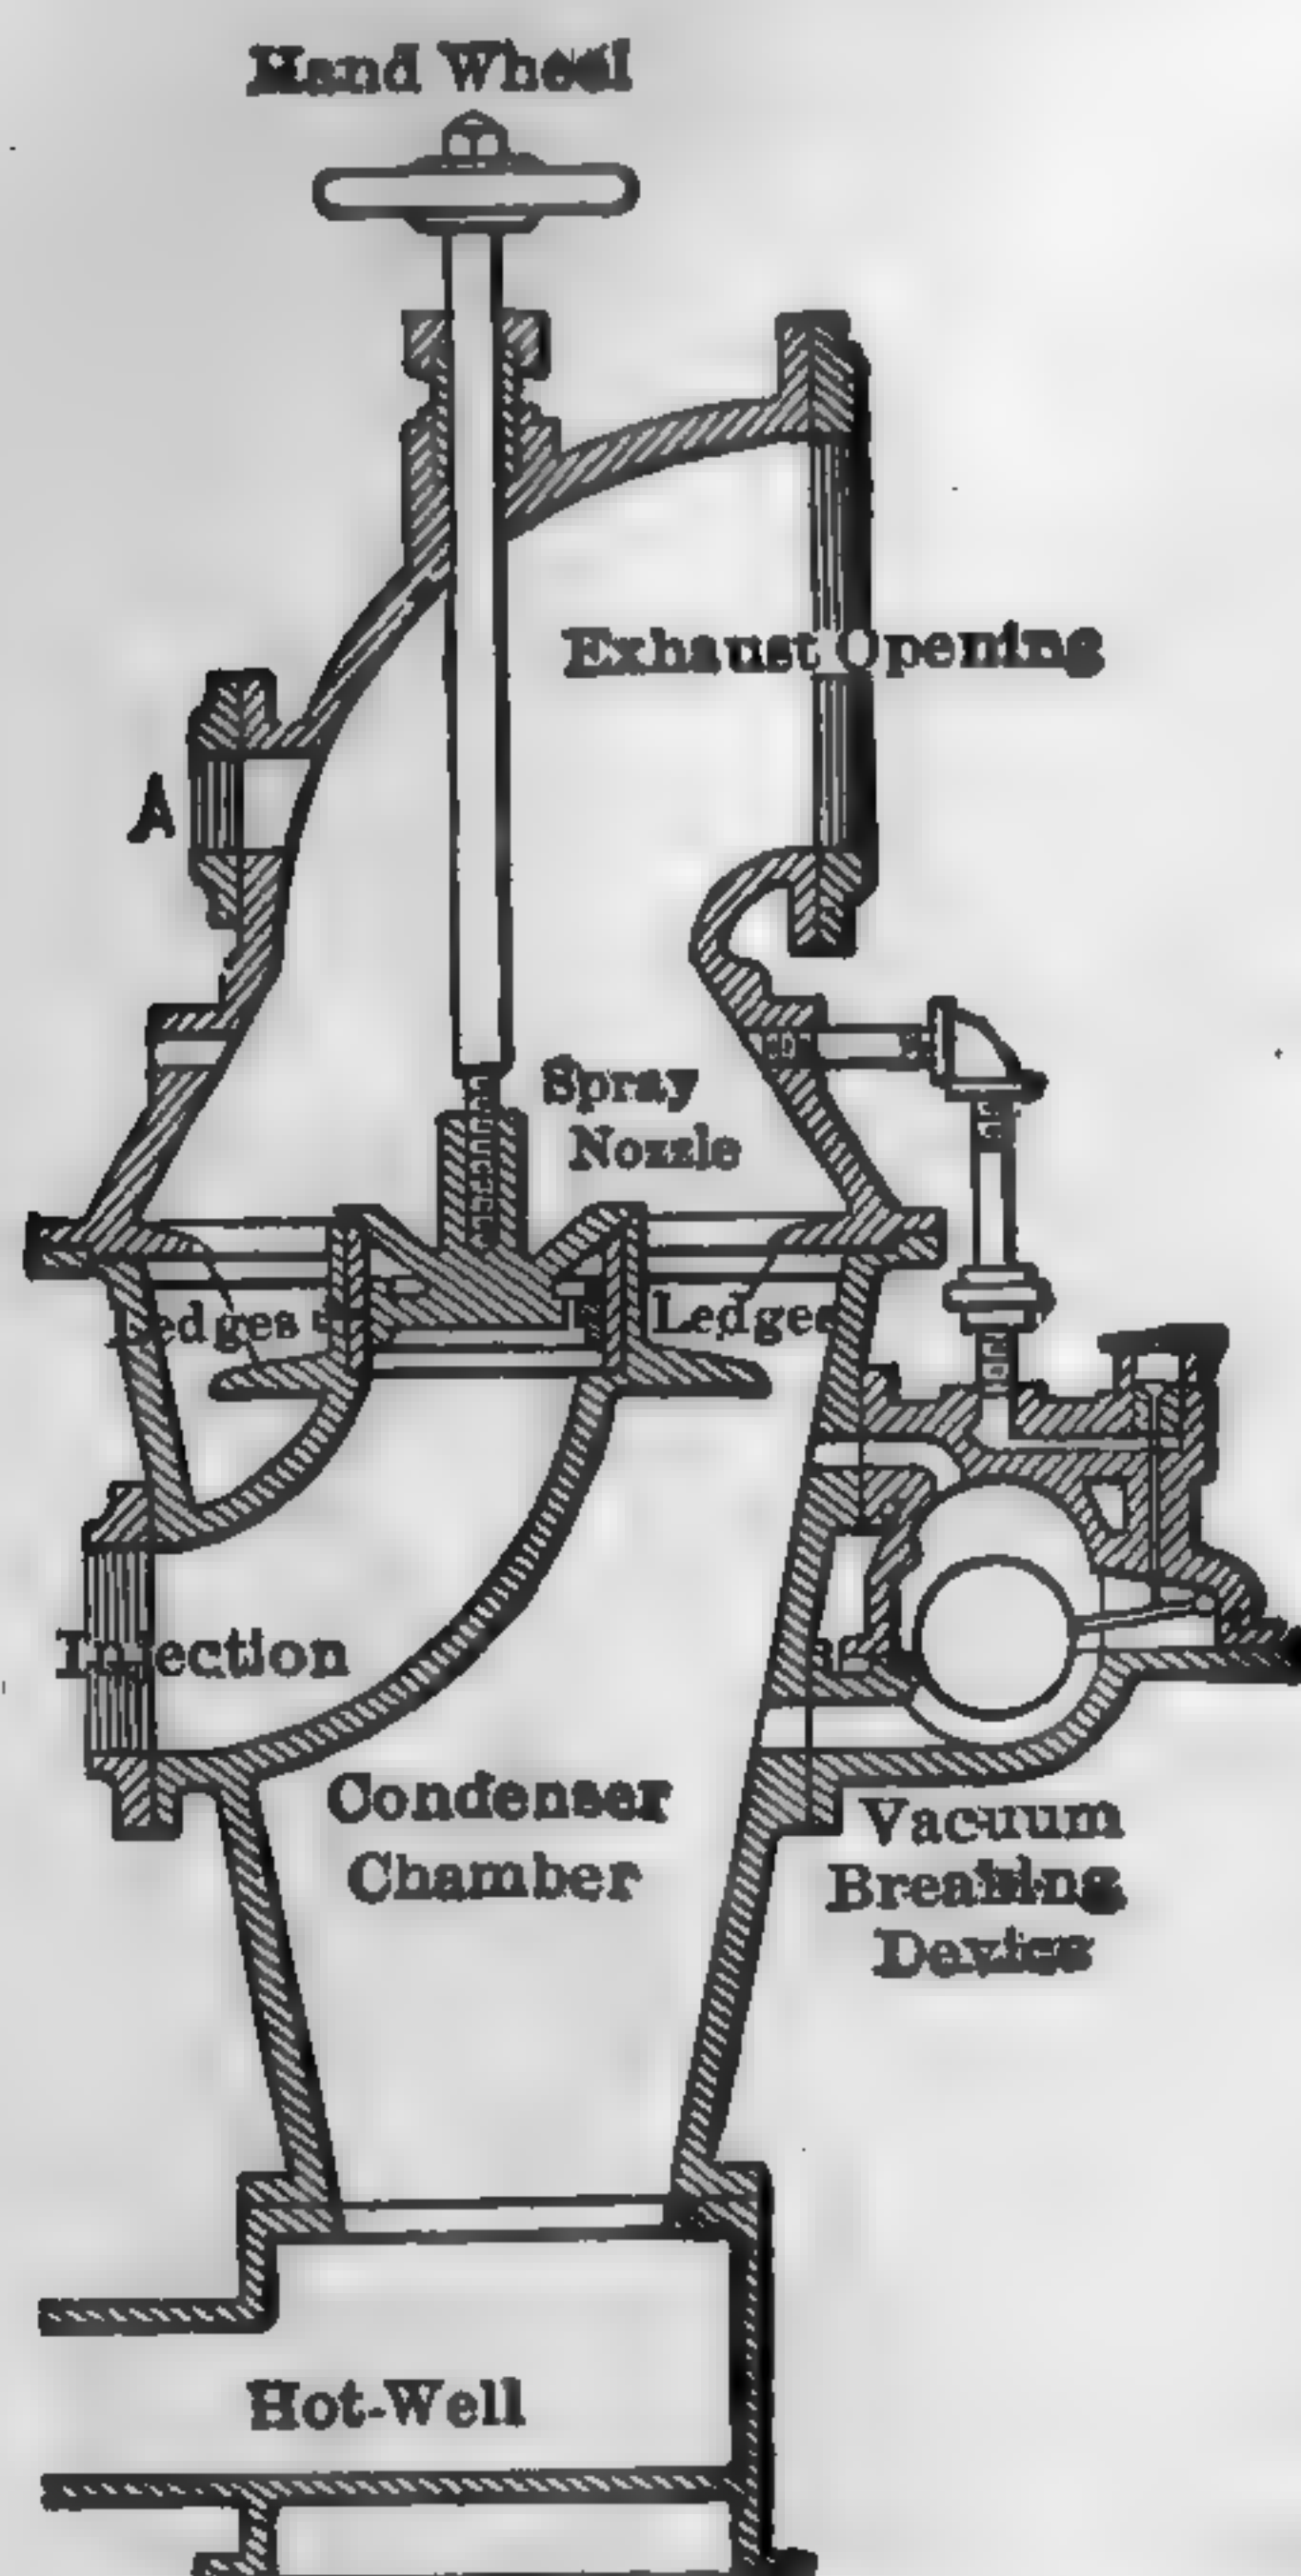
Section through Condensing Chamber of a Low-level, Low-vacuum Jet Condenser with Vacuum Breaking Device.
